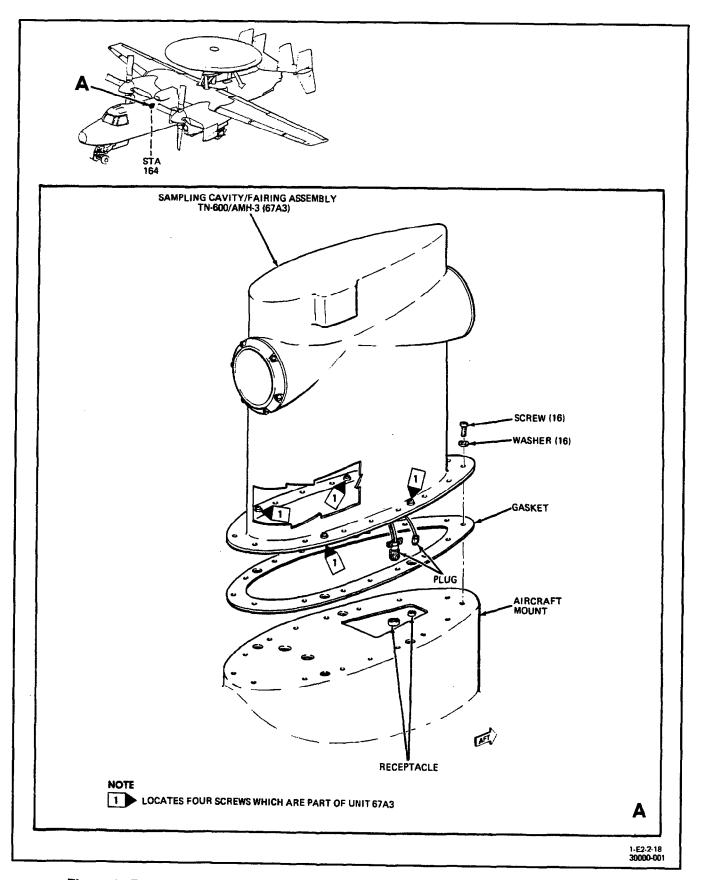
Removal and Installation of Sampling Cavity/Fairing Assembly TN-600/AMH-3
